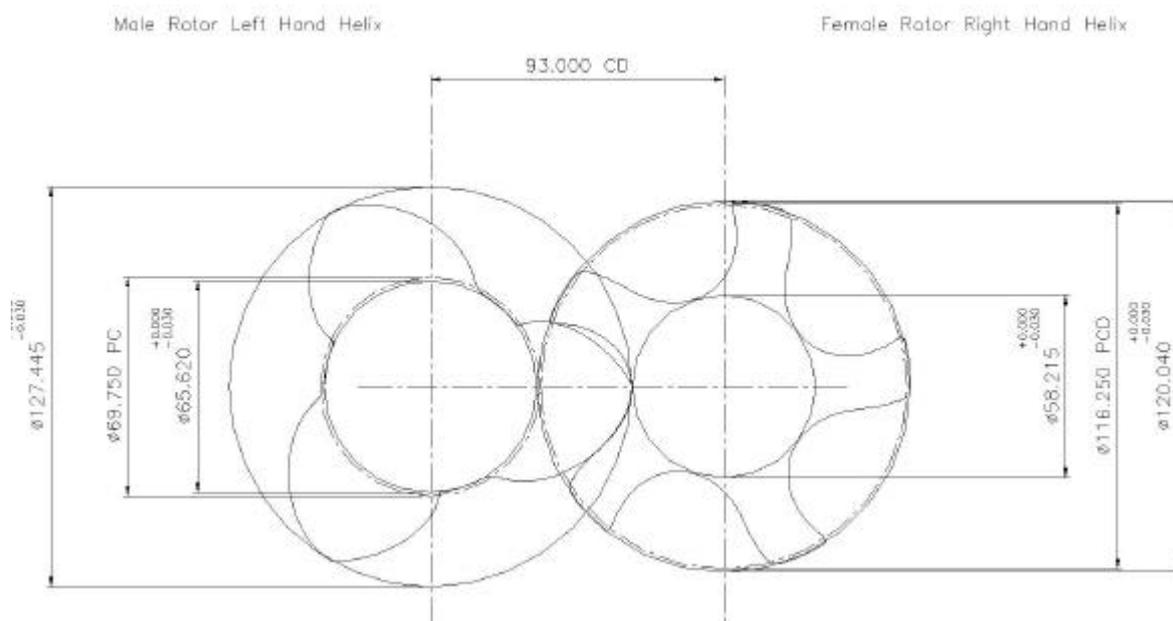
Drawing of 3/5 'N' rotors used in XK12 and XK18 compressors
